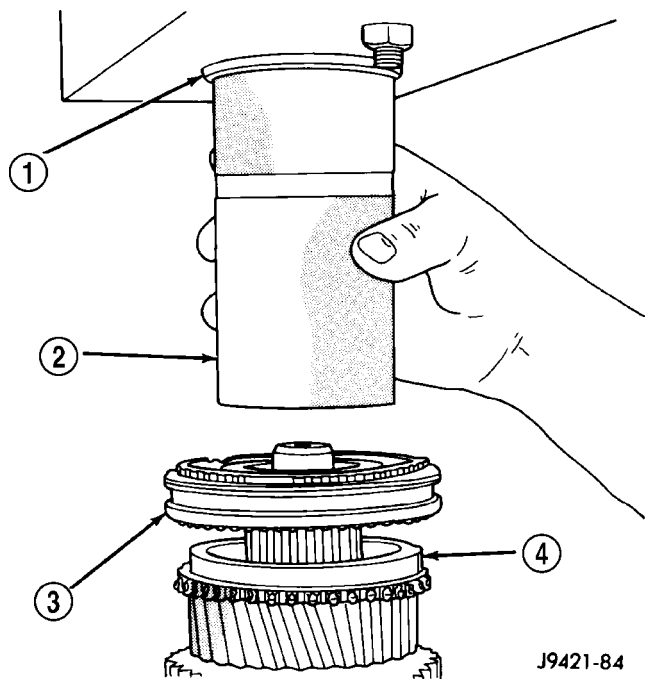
3-4 SYNCHRO ASSEMBLY ON SHAFT
